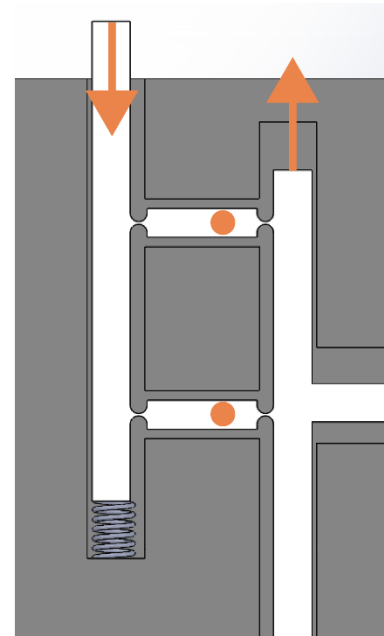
The mechanism is locked using a spring, and safety pin (not visible in the figure)
